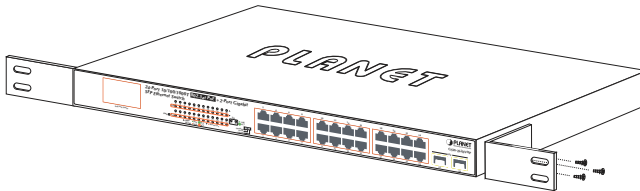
Attaching the Brackets to the 802.3at PoE+ Switch.
